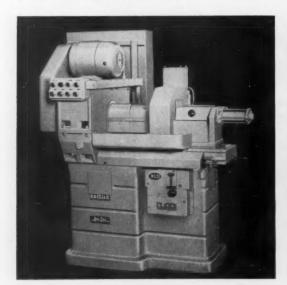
Ex-Cell-O machine for "Bor-Drilling" cast-iron distributor bases
